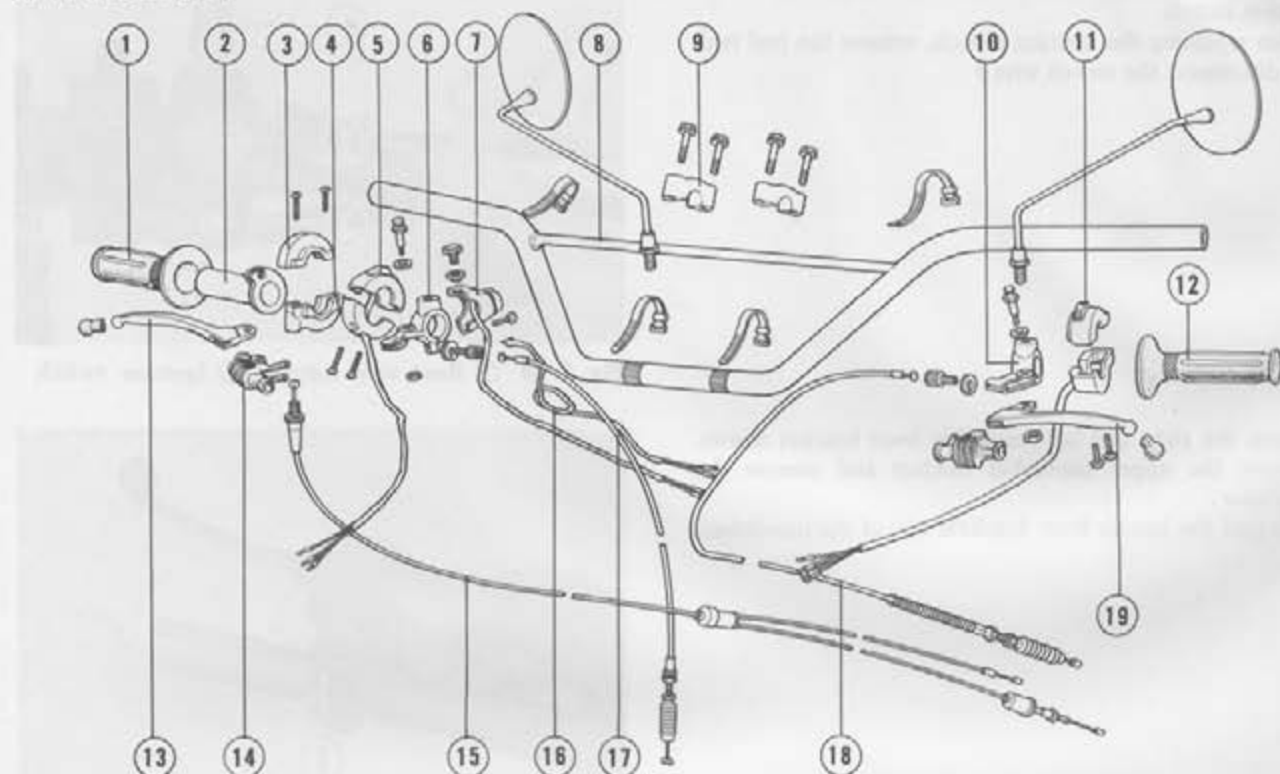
① Right handle grip ⑧ Handlebar ⑫ Left handle grip ⑯ Front stop switch
